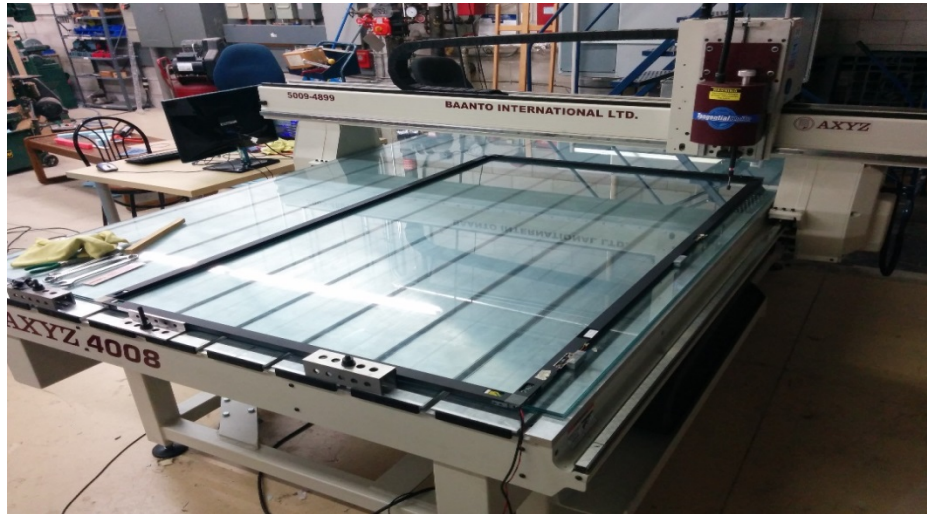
Fault tolerance testing set up on XYZ CNC machine
